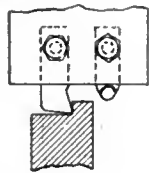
PISTON VALVE RING MACHINING—FIRST OPERATION.
